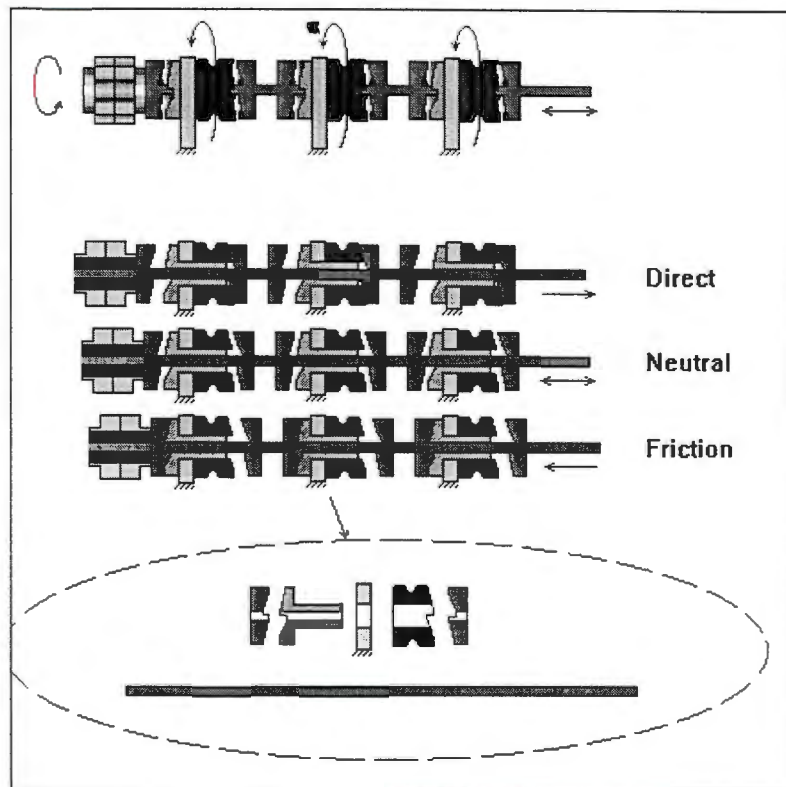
Achieving independence in the 3-finger link using a gear mechanism.
